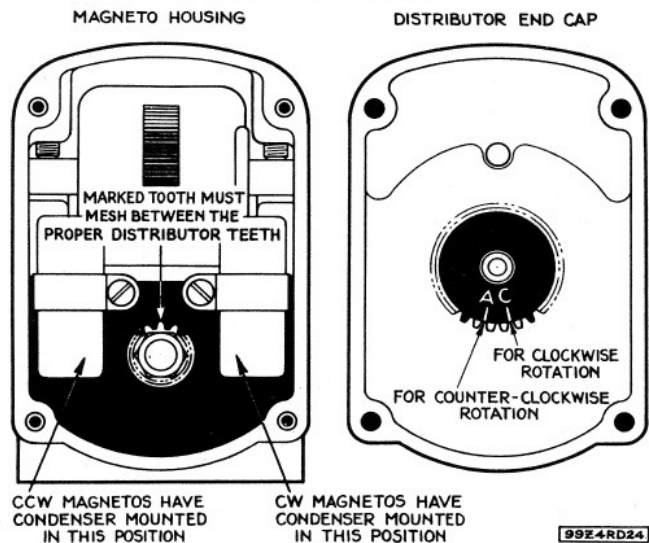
Meshing Distributor Gear and Rotor Pinion
